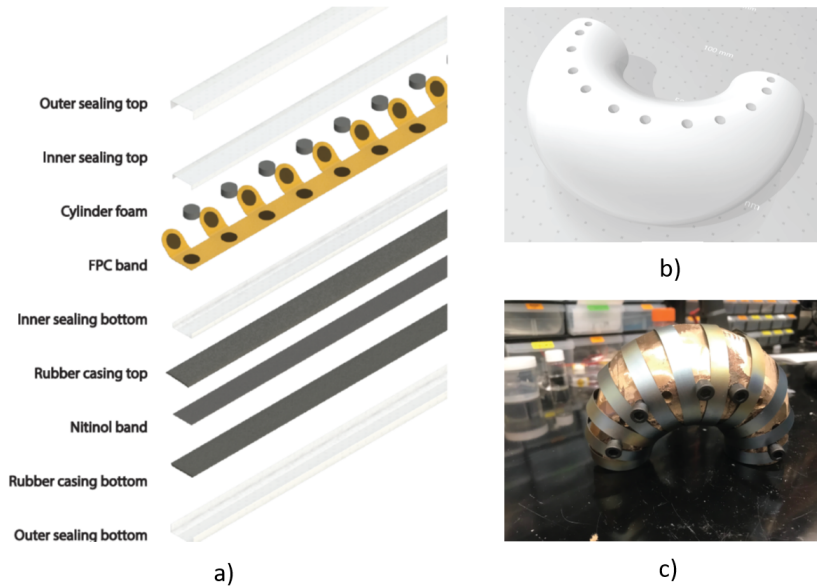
a) Exploded view drawing of motility probe. b) CAD file of the fixture for Nitinol shape-programming. c) Picture of riveted band on the bronze fixture.
